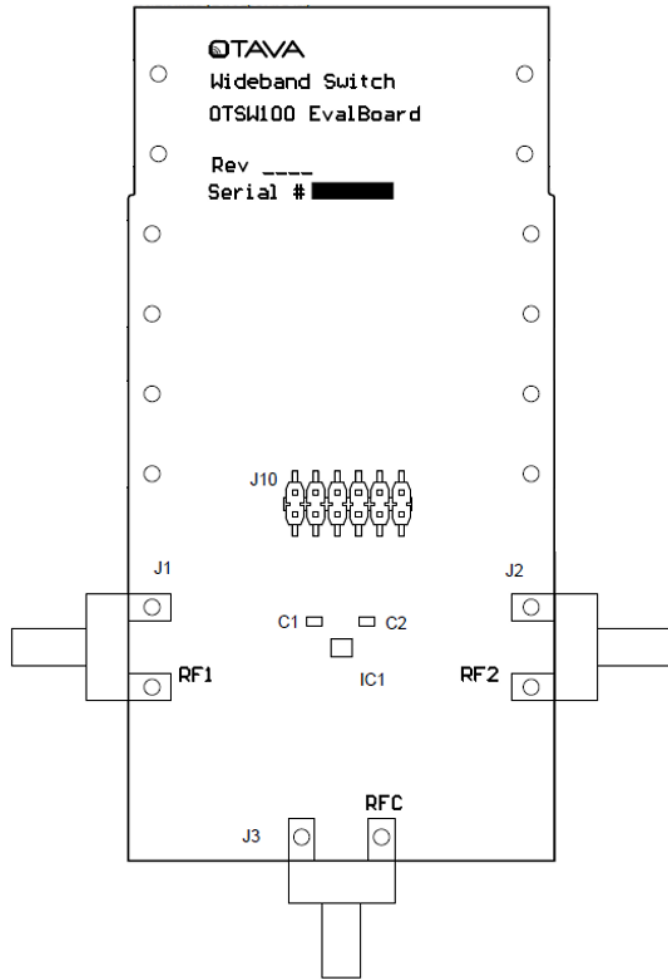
OTSW100-EVAL Assembly Drawing (Top)
